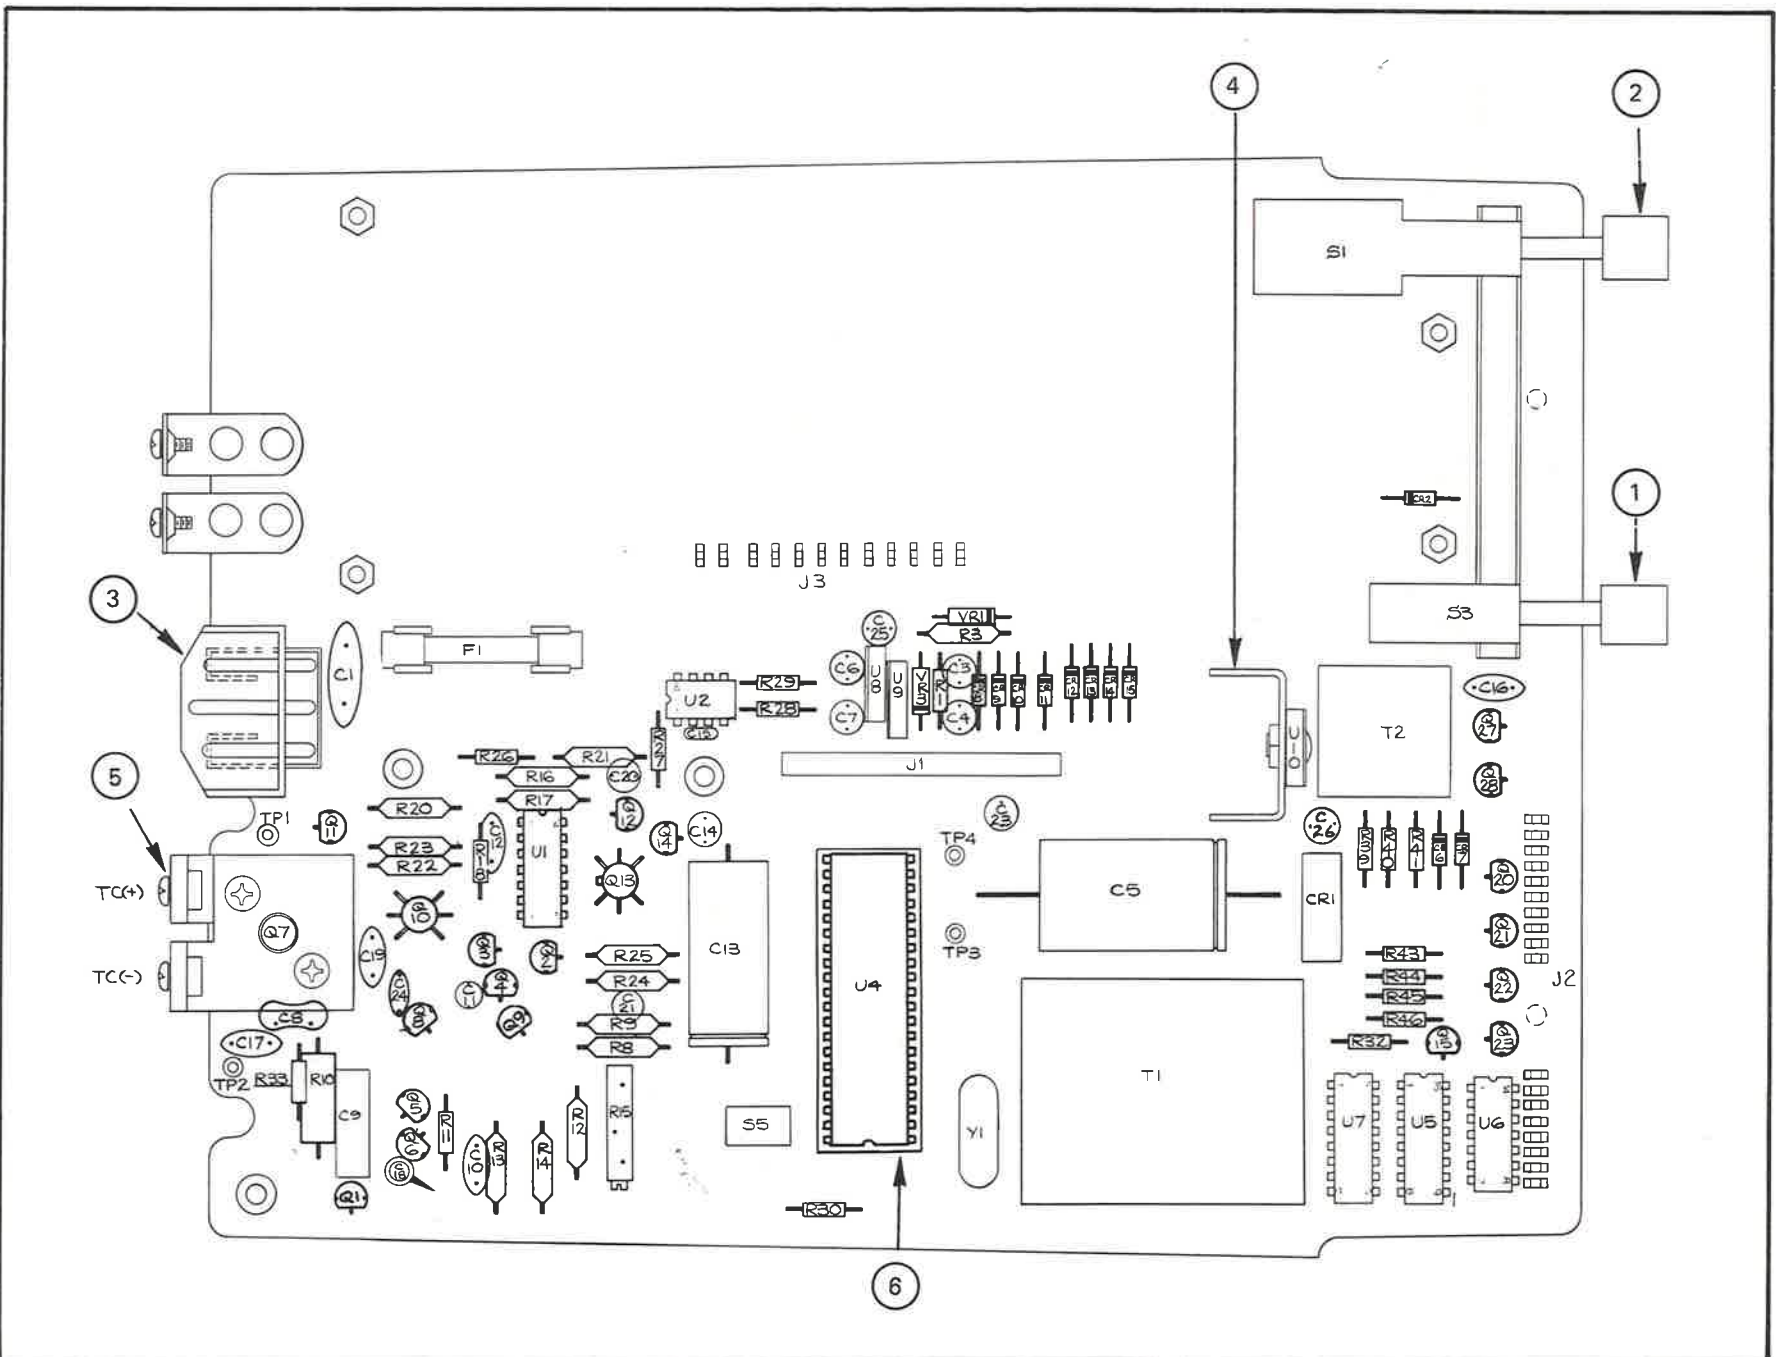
A1A1 THERMOMETER PCB ASSEMBLY COMPONENT LOCATION (2168A-1601)
